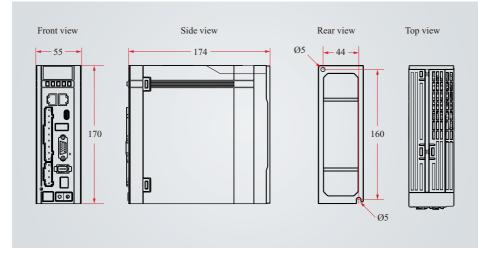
Installation dimensions for SIZE C (unit: mm)
